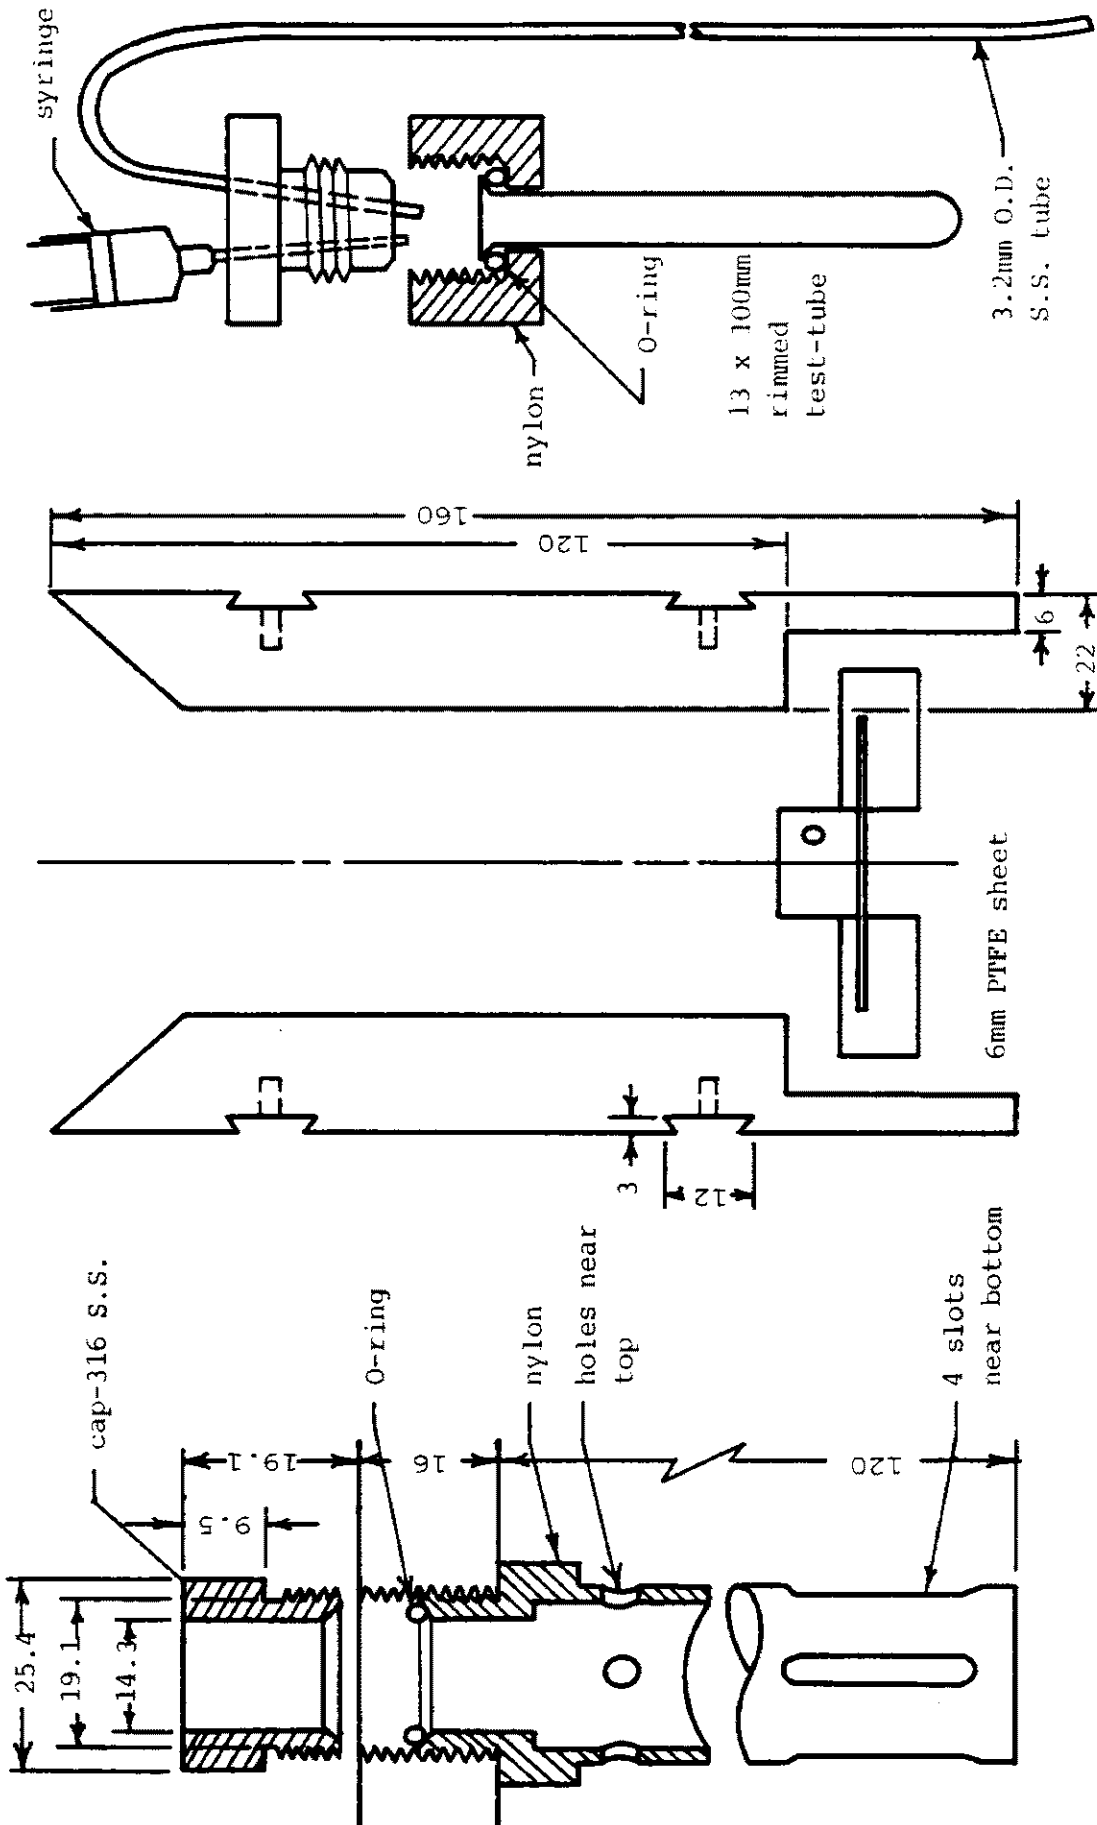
Electrode port and shroud assembly, baffle design and sampling device. All dimensions in mm.
